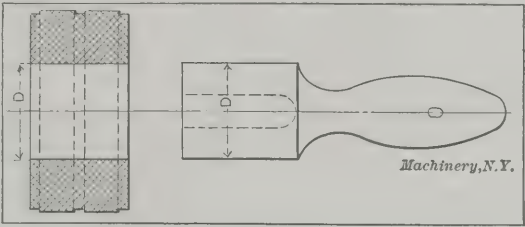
Ring Gage for Testing Master Bolt, and Plug Gage for Testing Ring Gage
